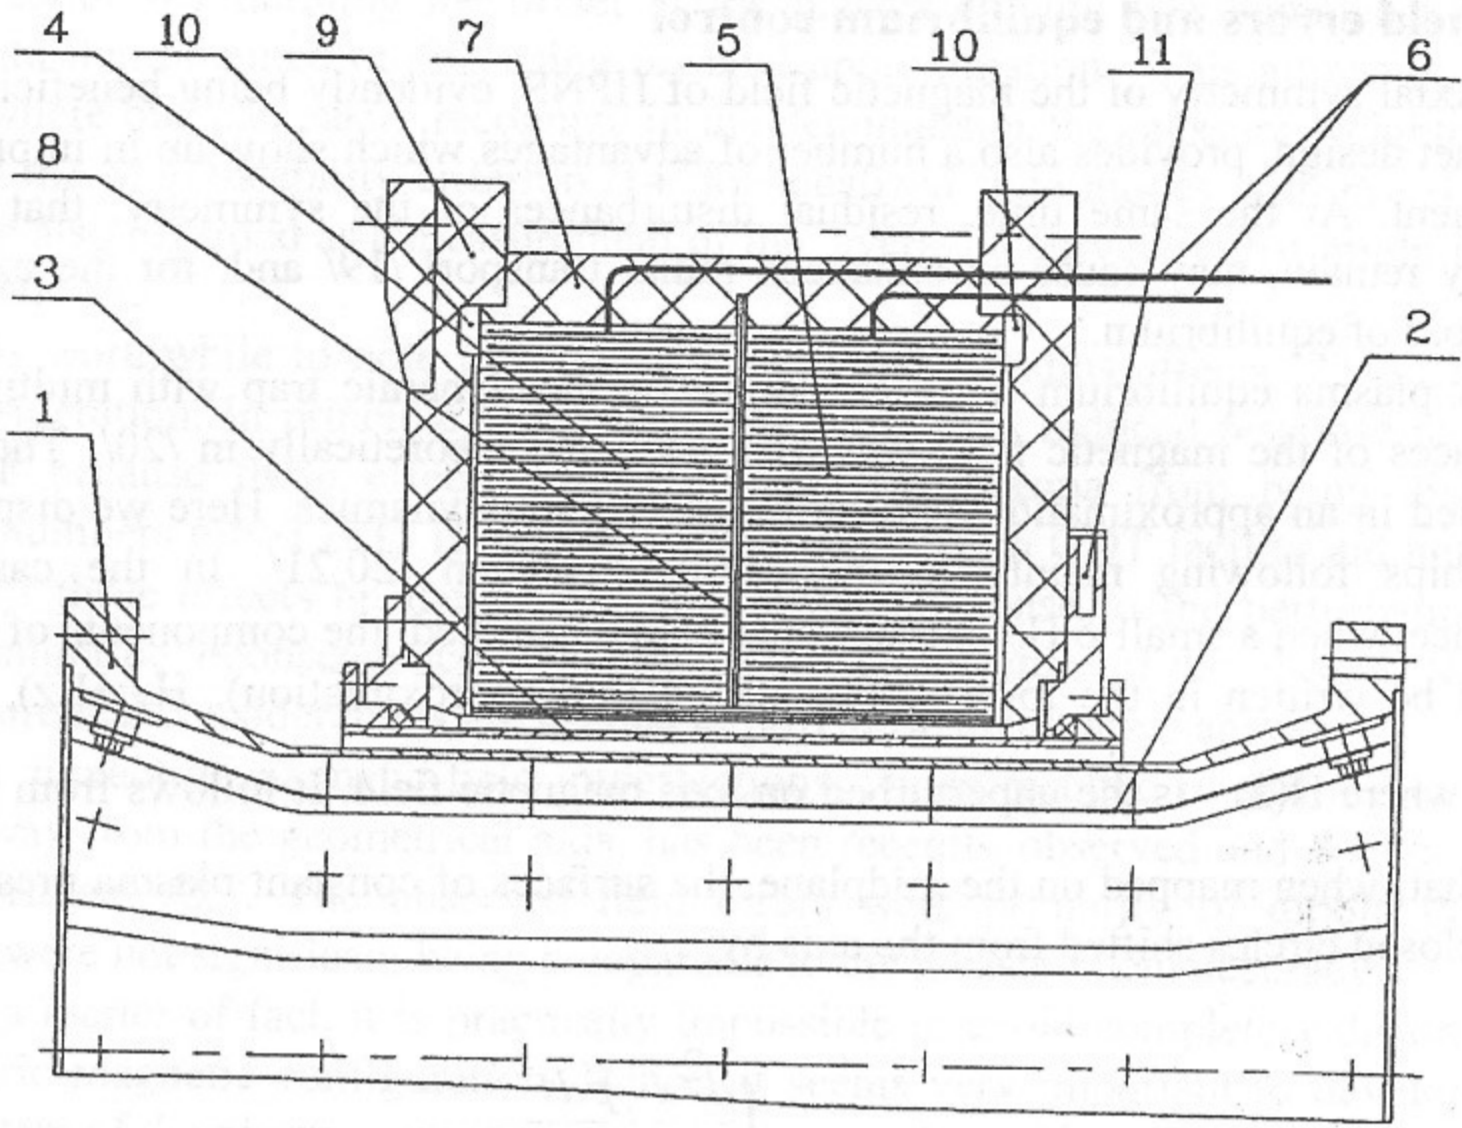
Layout of mirror magnet: 1- vacuum chamber wall; 2- Nb-liner; 3- Screen; 4,5- sections of the coil; 6- feeds;7- spacer, 8- insulating disk (glass cloth laminate); 9- side flanges; 10- cooling air inlet and outlet (11).
